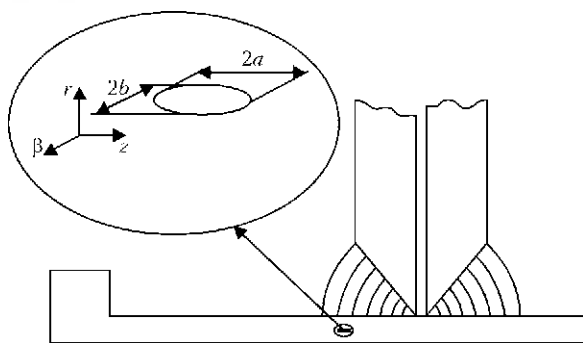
Scheme of lamellar crack in the welded joint zone
